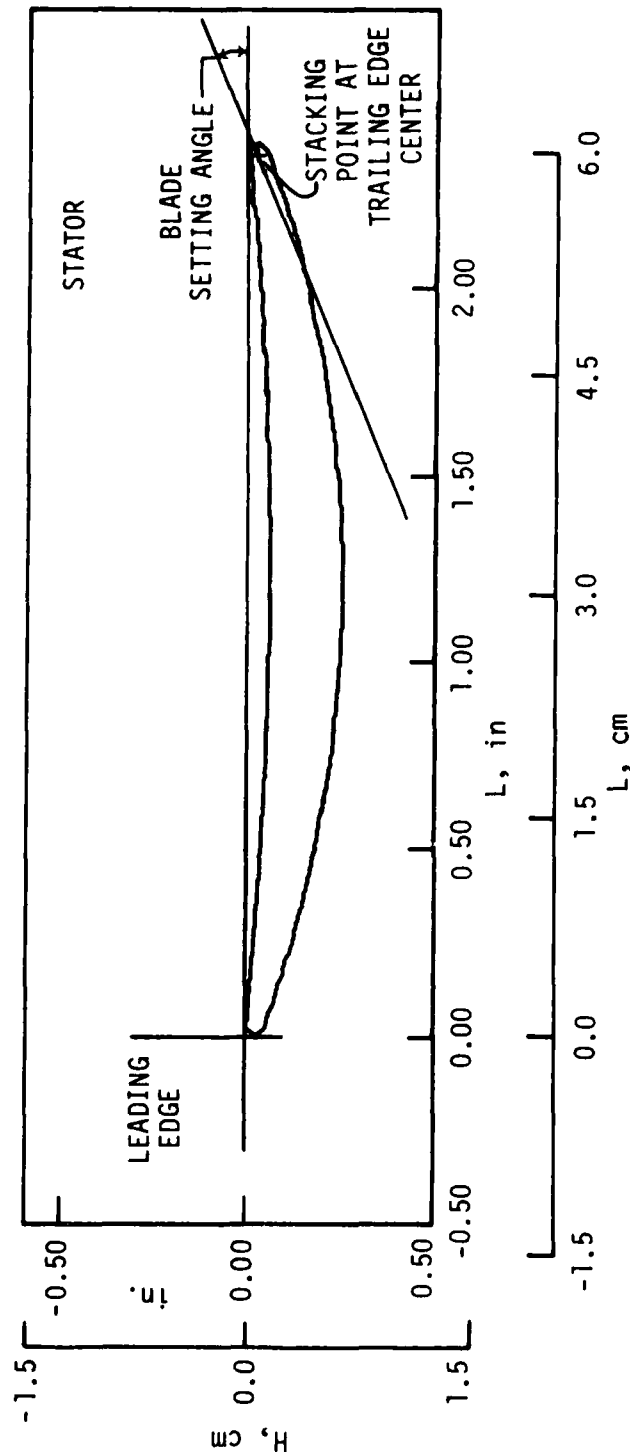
Typical modified stator blade section using manufacturing coordinates.
